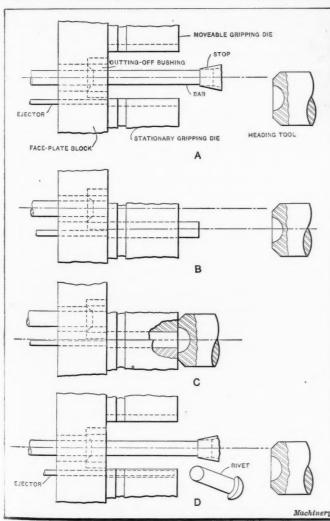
Successive Steps in the Formation of a Round-head Rivet in a Single-blow Rivet Machine of the Continuous-motion Type
